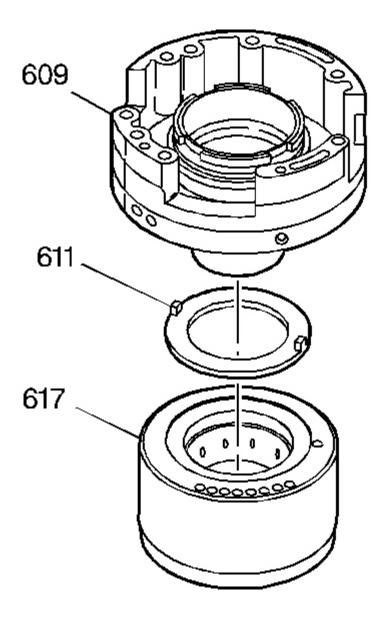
Identifying Second Clutch Housing Thrust Washer Courtesy of GENERAL MOTORS CORP.
